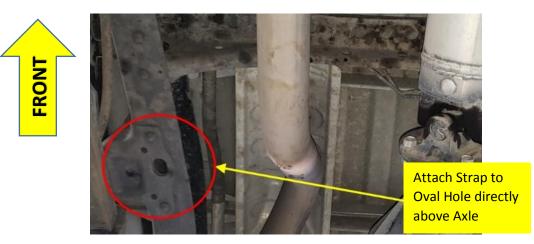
Frame Mounting Hole for Air Tank Torque Strap
